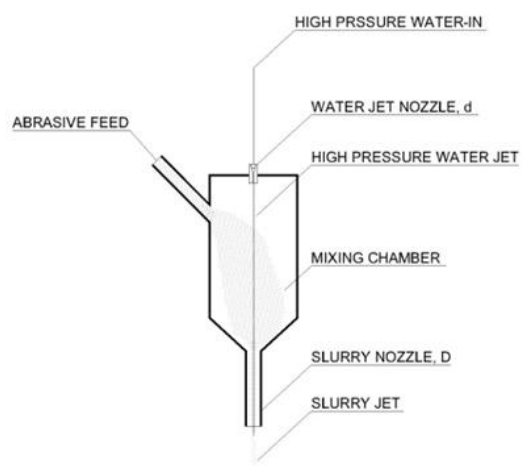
Conventional Abrasive Waterjet Cutting Head (Galecki et al., 2011)
